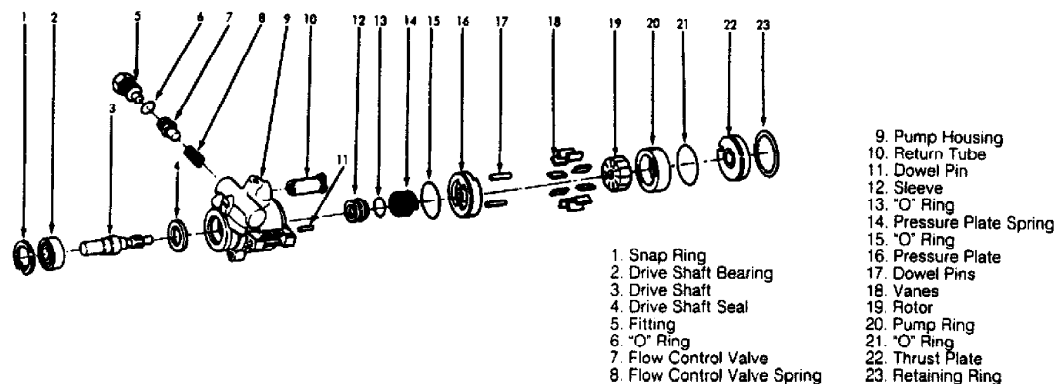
Exploded View of Cherokee & Comanche Pump Assembly
